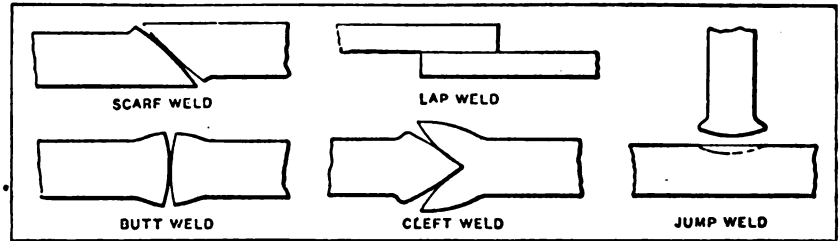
THERE ARE FIVE COMMON METHODS OF FORMING THE ENDS OF STOCK PRIOR TO WELDING
